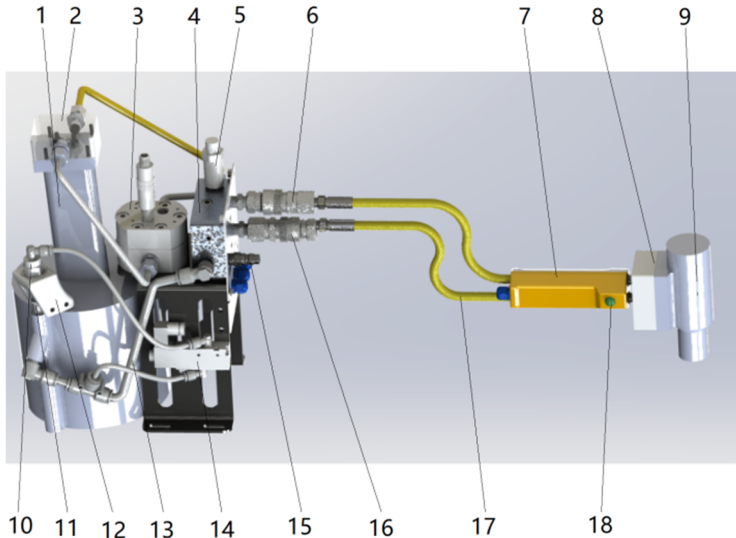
Original Structure of HUCK256 Pneumatic Riveter
